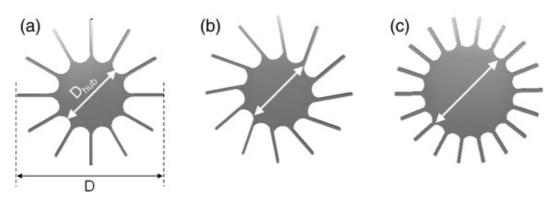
Paddle wheel shapes investigated: (a) standard, (b) angled and (c) large hub wheel [30]
